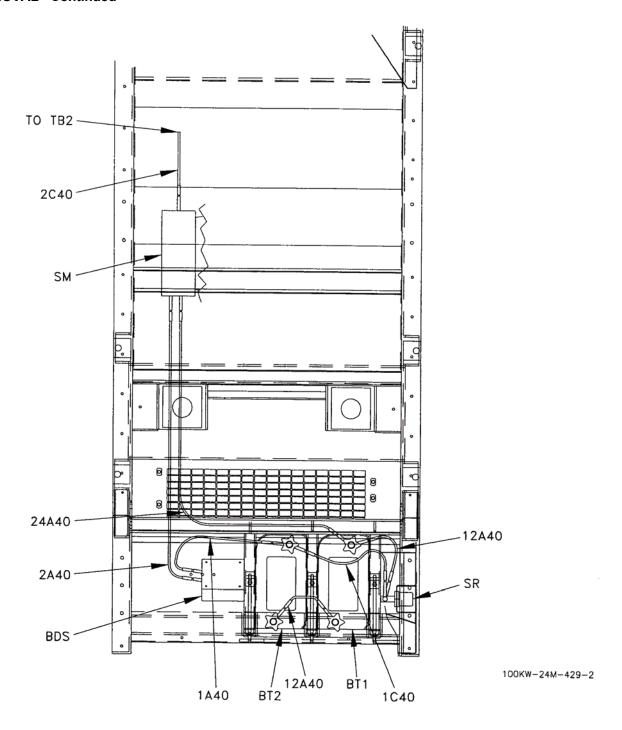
Battery Cable Assemblies (Sheet 2 of 2).
